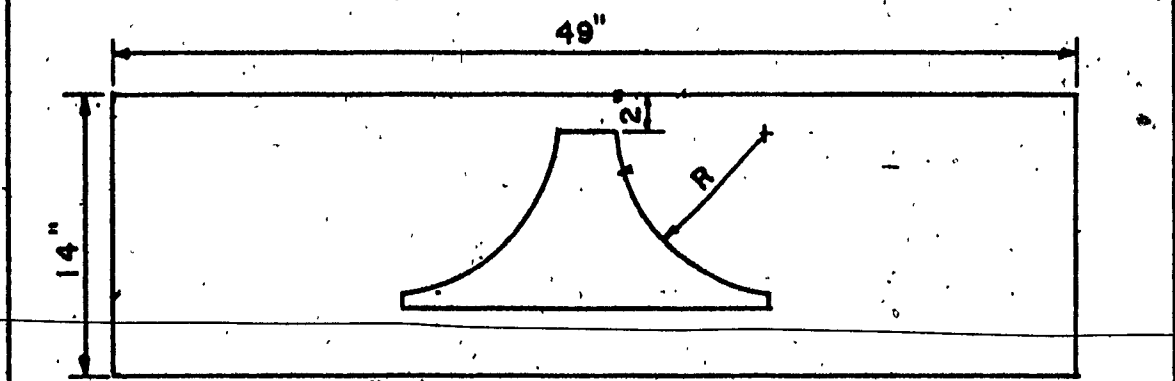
WEIR PLATE ASSEMBLY - GENERAL CASE
